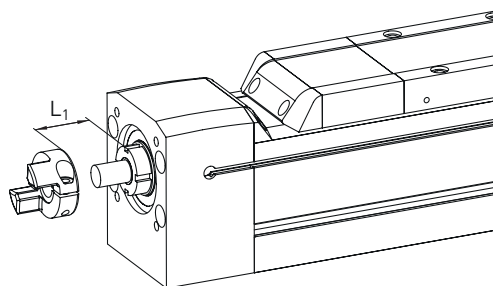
Attaching the clamping hub to the linear axis HM-S drive journal
